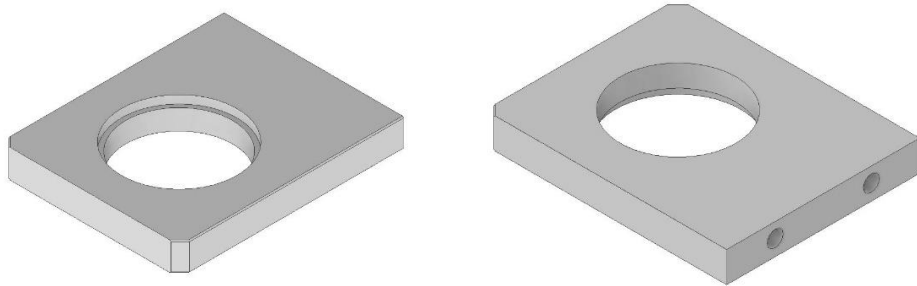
Finalised tube lens holster front isometric (left) and back isometric renderings (right)
